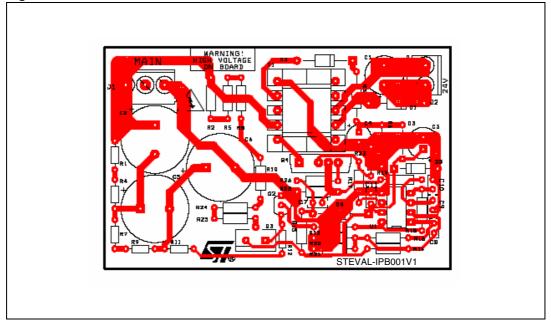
Bottom view of the STEVAL-IPB001V1 demo board
